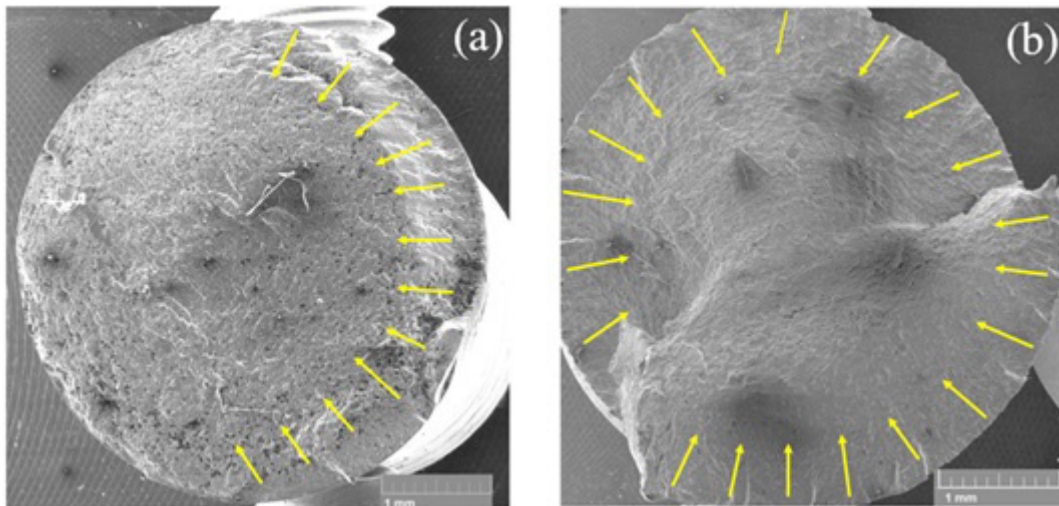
Fatigue fractures: (a) sample without shot peening; (b) sample with shot peening. (SEM)
